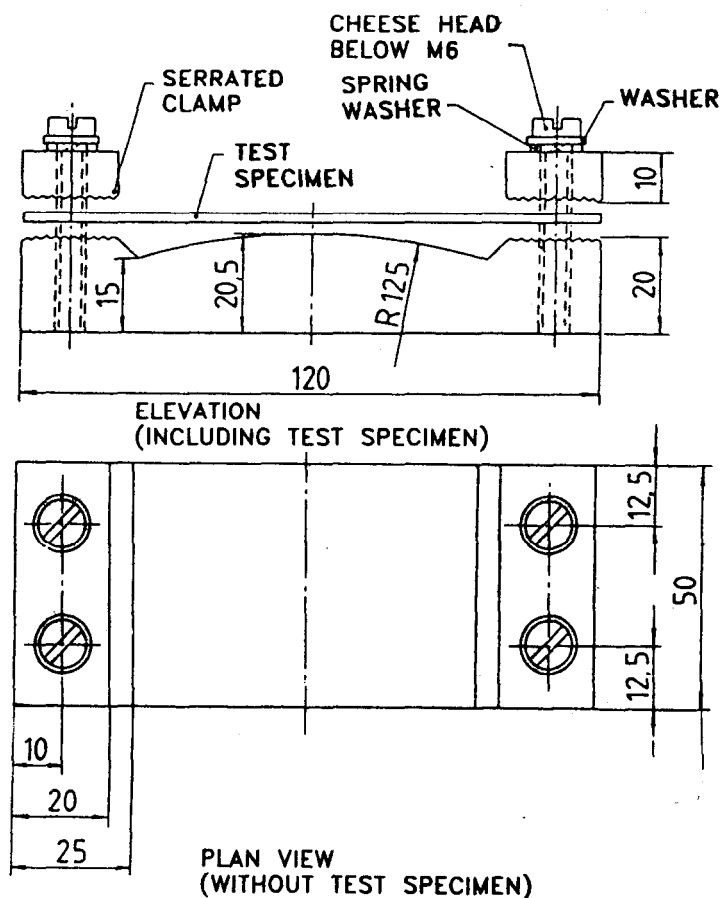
STEEL CLAMPING DEVICE FOR TESTING RESISTANCE TO CRACKING
